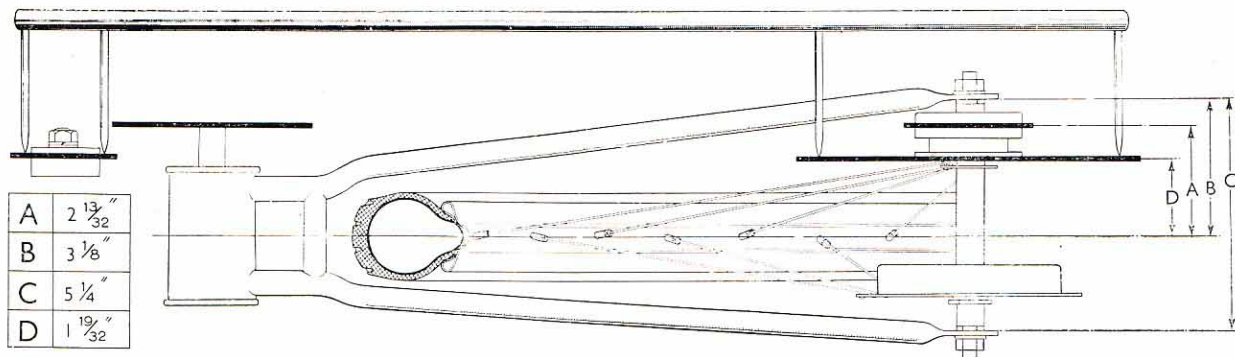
This illustration shows the rear wheel and chain alignment. It also shows the alignment gauge (CA. 23) for checking the clutch and rear wheel sprockets.
